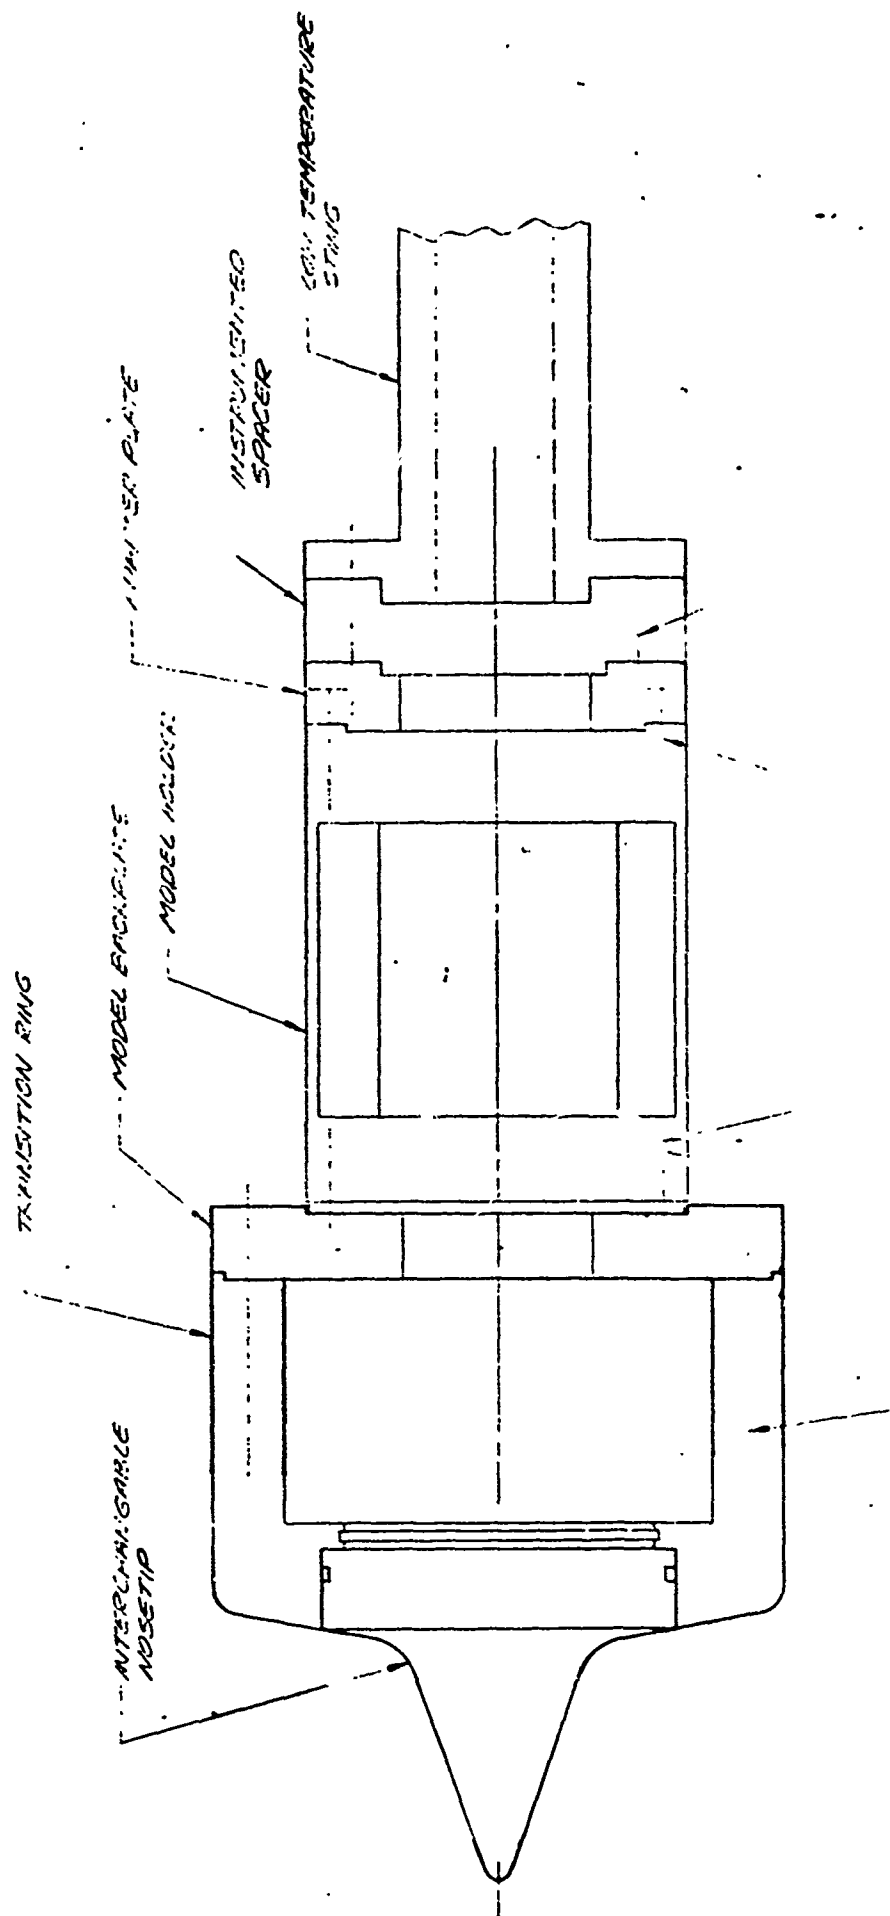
Interchangeable Nosetip Assembly Drawing
